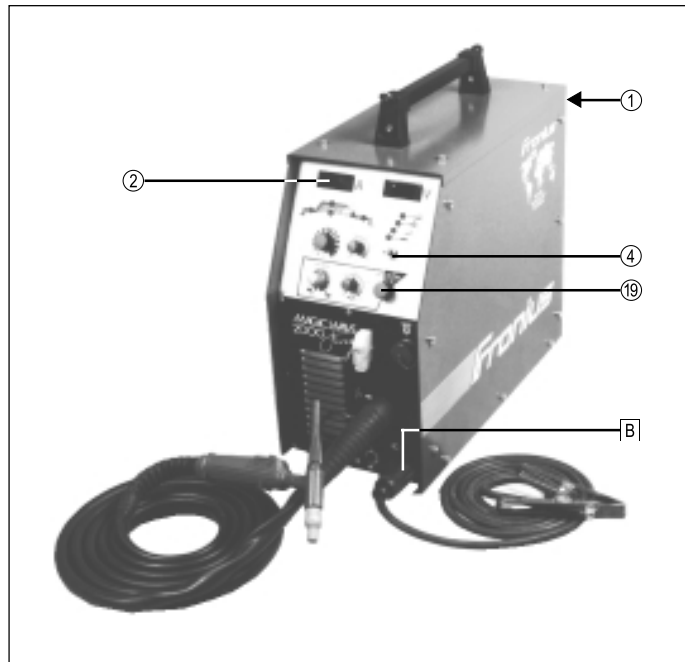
Magic Wave 2000 Fuzzy resp. Transtig 2000 TIG welding machine consisting of: power source with control unit, AL 22 manual torch, earth cable, gas cylinder with pressure regulator.
